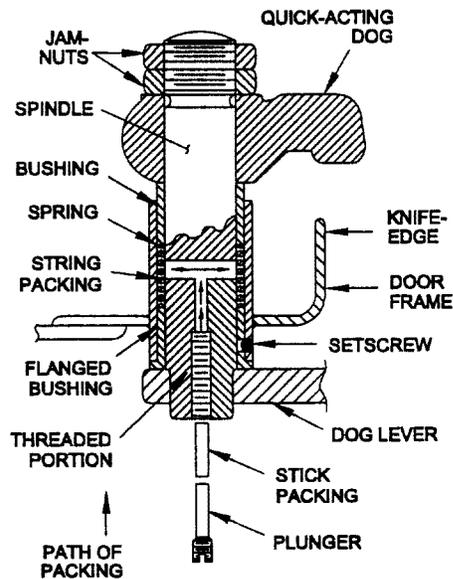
Quick-Acting Door Dog Assembly (Cross Sectional View)
